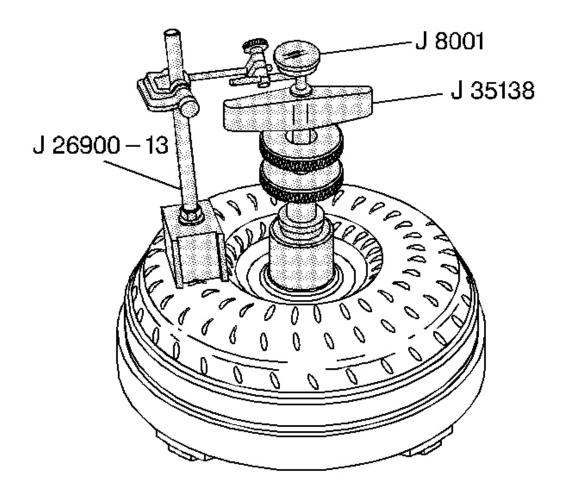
Identifying J 35138, J 26900-13 & J 8001 Courtesy of GENERAL MOTORS CORP.
